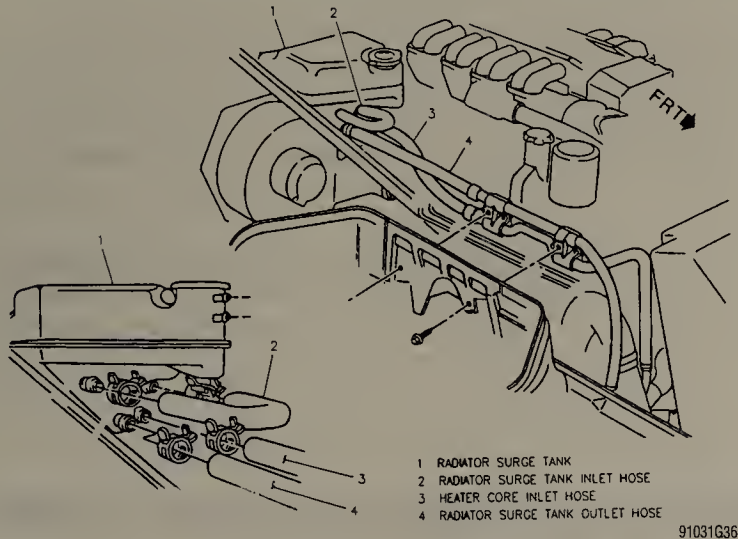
Heater hose locations and routing—5.7L (VIN J) engine
